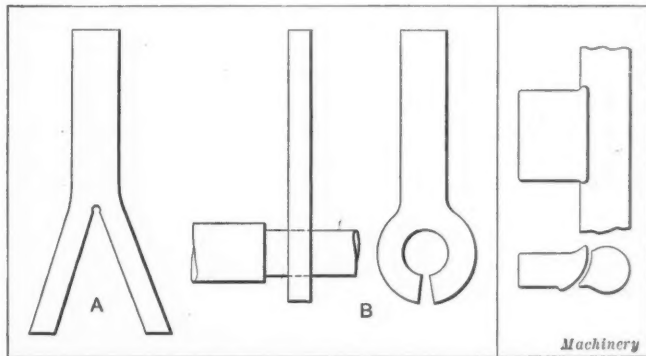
Welding Large Lever to Weigh Shaft—Lever embracing Shaft
